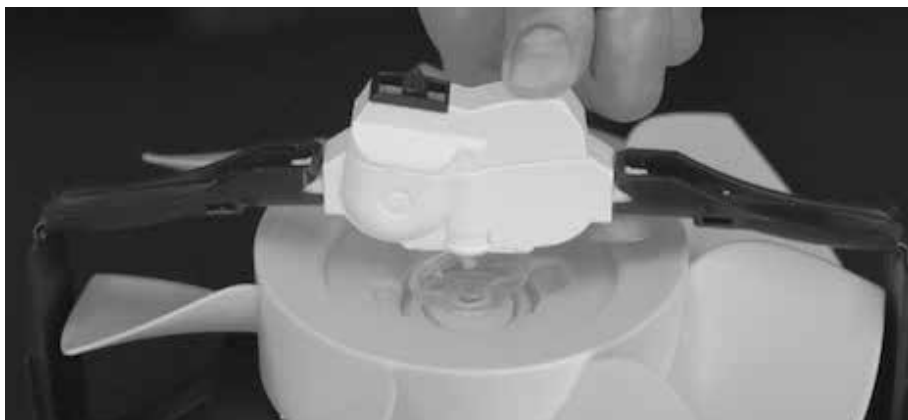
Fig D. ... and push it up into the gear until it fits tight ... models with a small white pin, first insert the pin through the rubber coupling and then push both up into the gear until it fits. Step-by-step video tutorials of this process can be found at https://www.venta-air.com/en_us/service/tutorials/.
